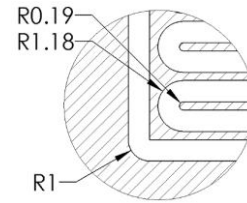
Schematic detail view of bottom left corner of channel field (dimensions in mm)
